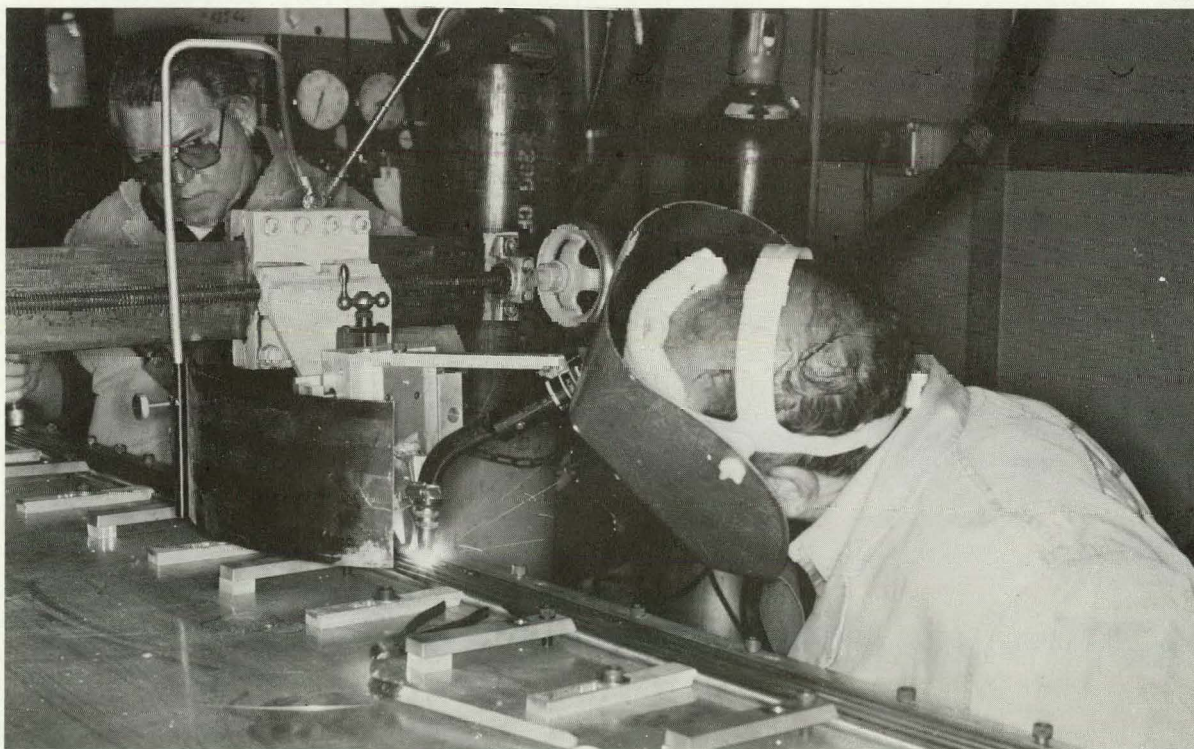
Automatic Welding of Five-Tube Panel
